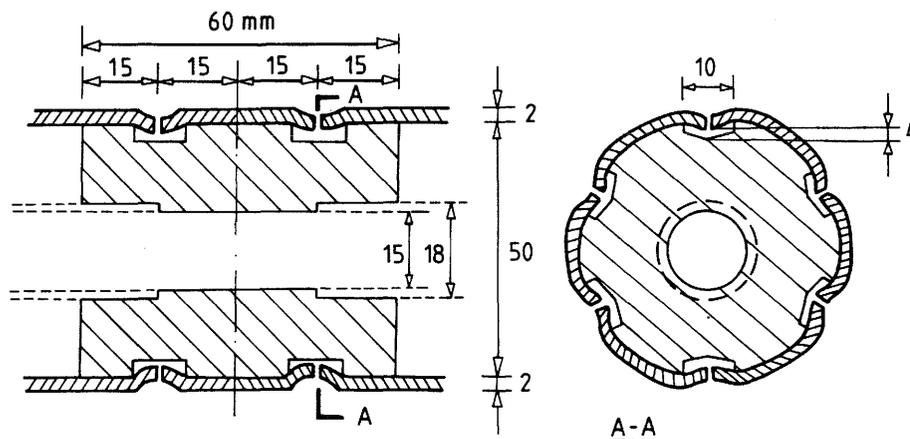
Connection of casing segments to inner jointing sleeve of copper
